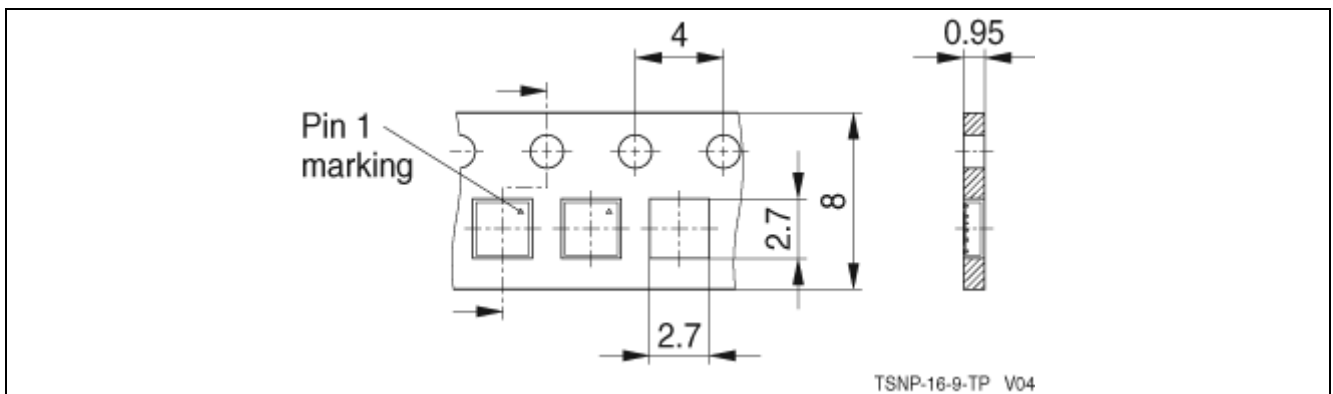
Packing Description of TSNP-16-9; \varnothing Reel: 180 mm, Pieces / Reel: 3000, Reels / Box: 1
